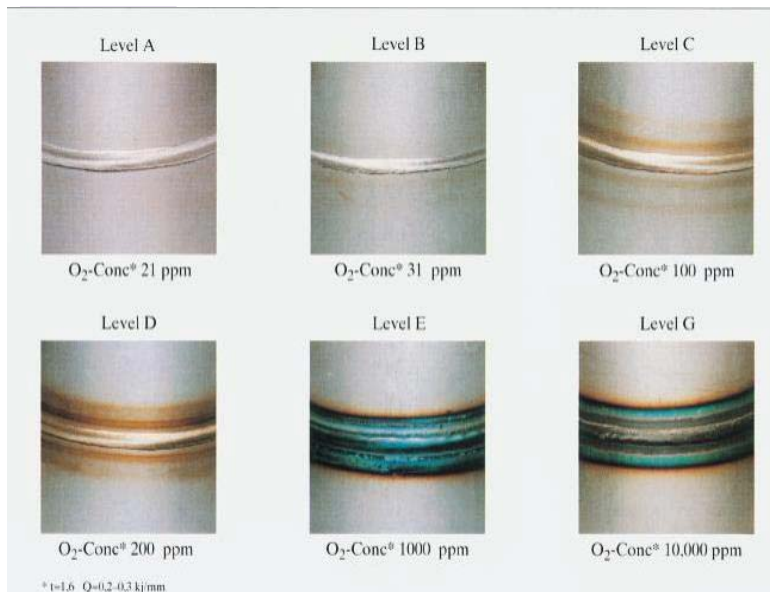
Using a Reference Colour Chart, it is possible to specify an acceptable heat tint on and adjacent to TIG welds on stainless steel piping. This permits visual inspection as well as video endoscopy. Courtesy of FORCE Institute.
